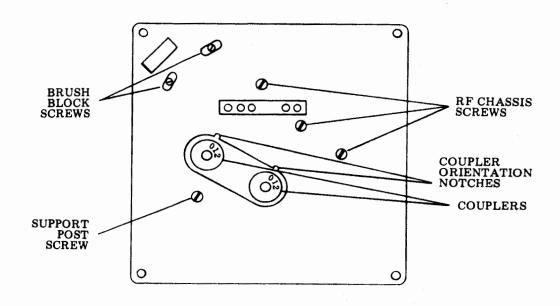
RF Amplifier Assembly A2A4, Bottom View, Disassembly Screw Locations
